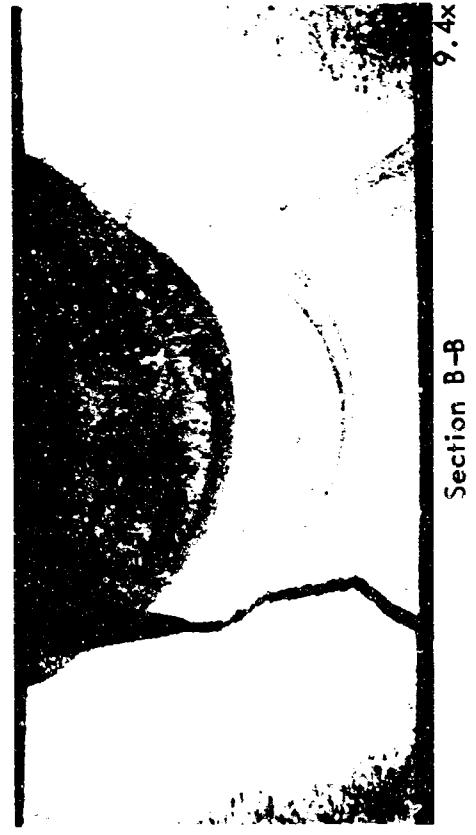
CRACK PATH AND FRACTURE APPEARANCE IN 2021-T81 ALUMINUM
